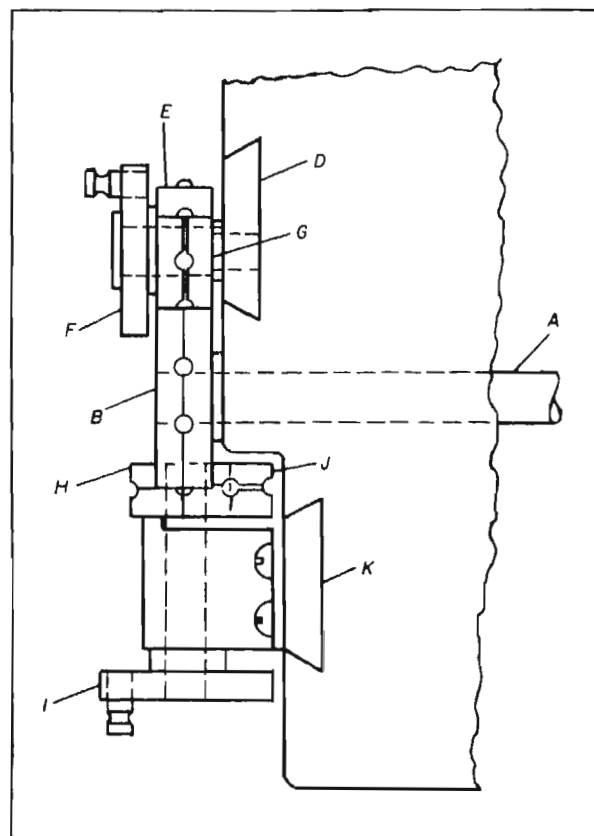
Continuous rotation of wire guides on discs *F* and *I* sets up a "lay" pattern woven in a wire fabric, as shown by this right-hand view of the machine component plan seen in Fig. 9.
